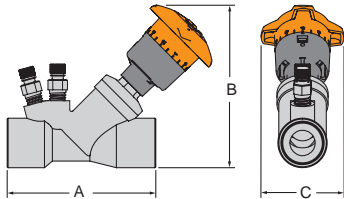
FIGURE GBV-A - GROOVED-END ANGLE BALANCING VALVES
